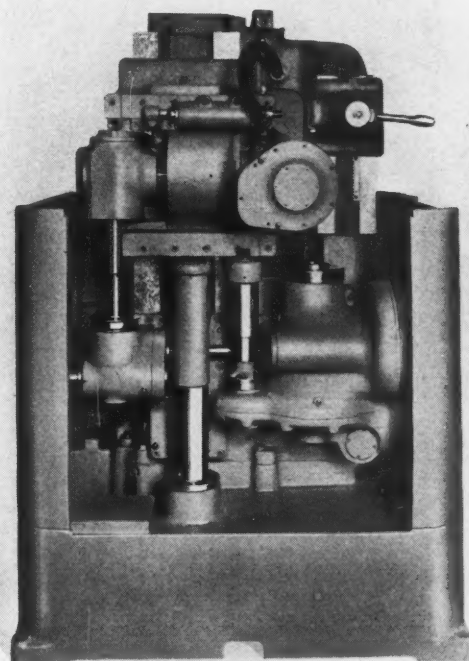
Automatic Hobbing Machine with Guard Removed to Show the Arrangement of the Cutter and Work Units
